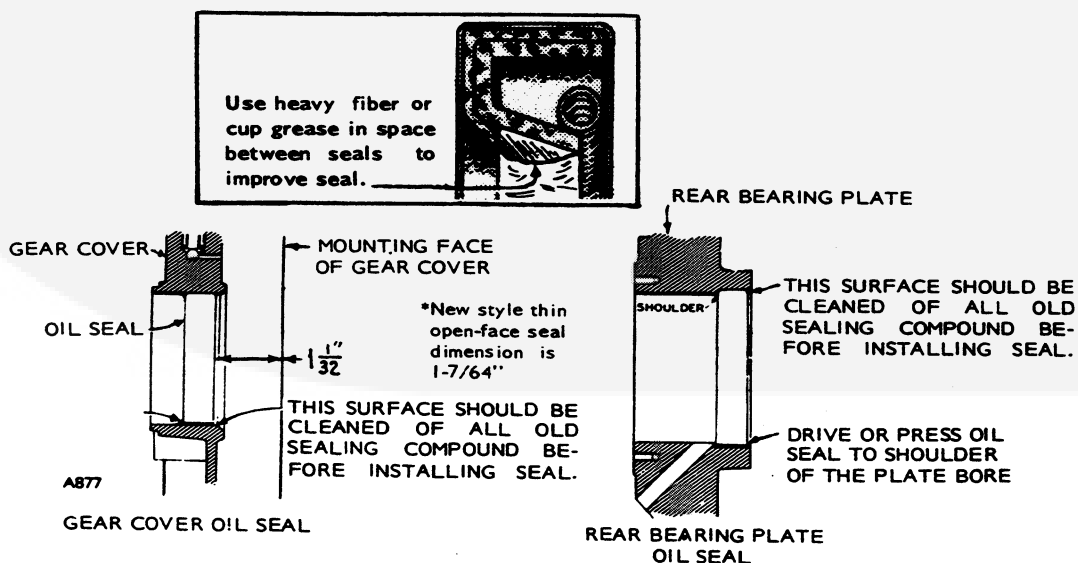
GEAR COVER AND REAR BEARING PLATE OIL SEALS
